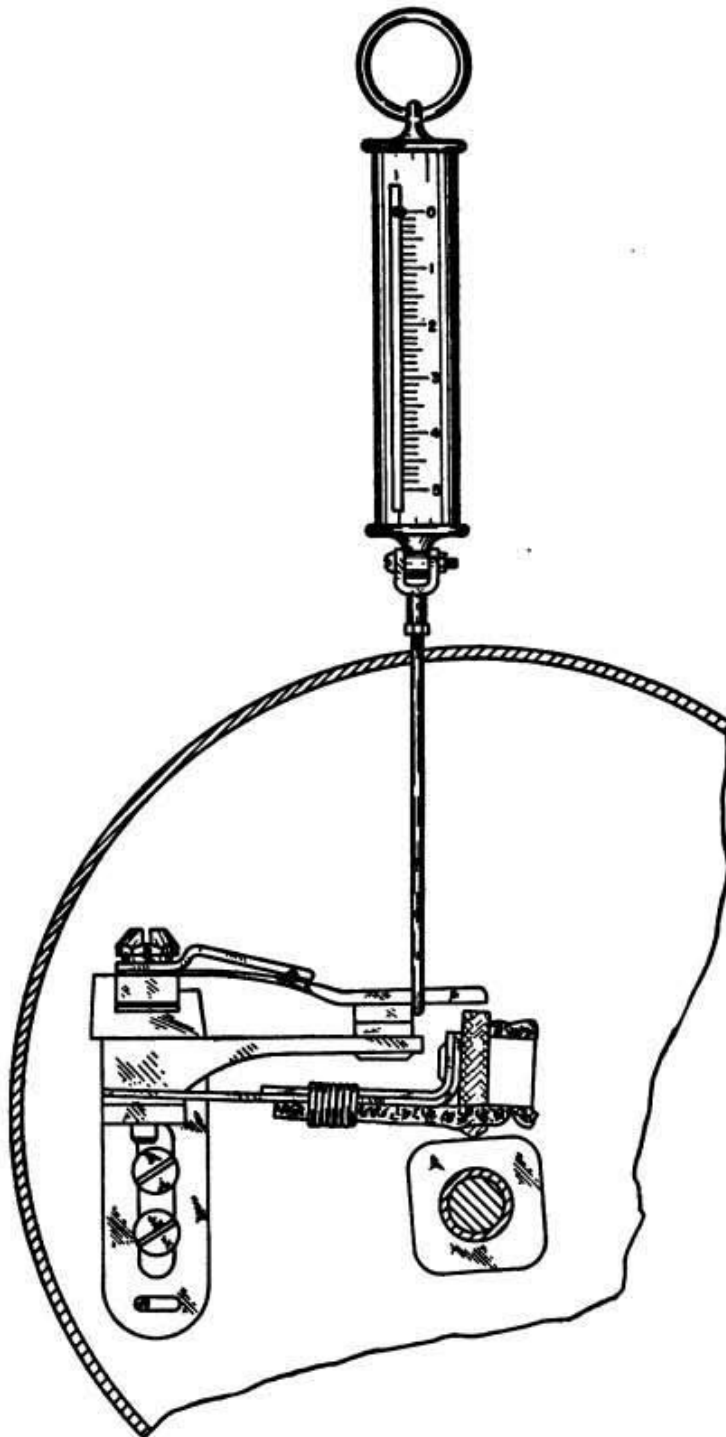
Testing the magneto breaker-arm spring for proper tension.
